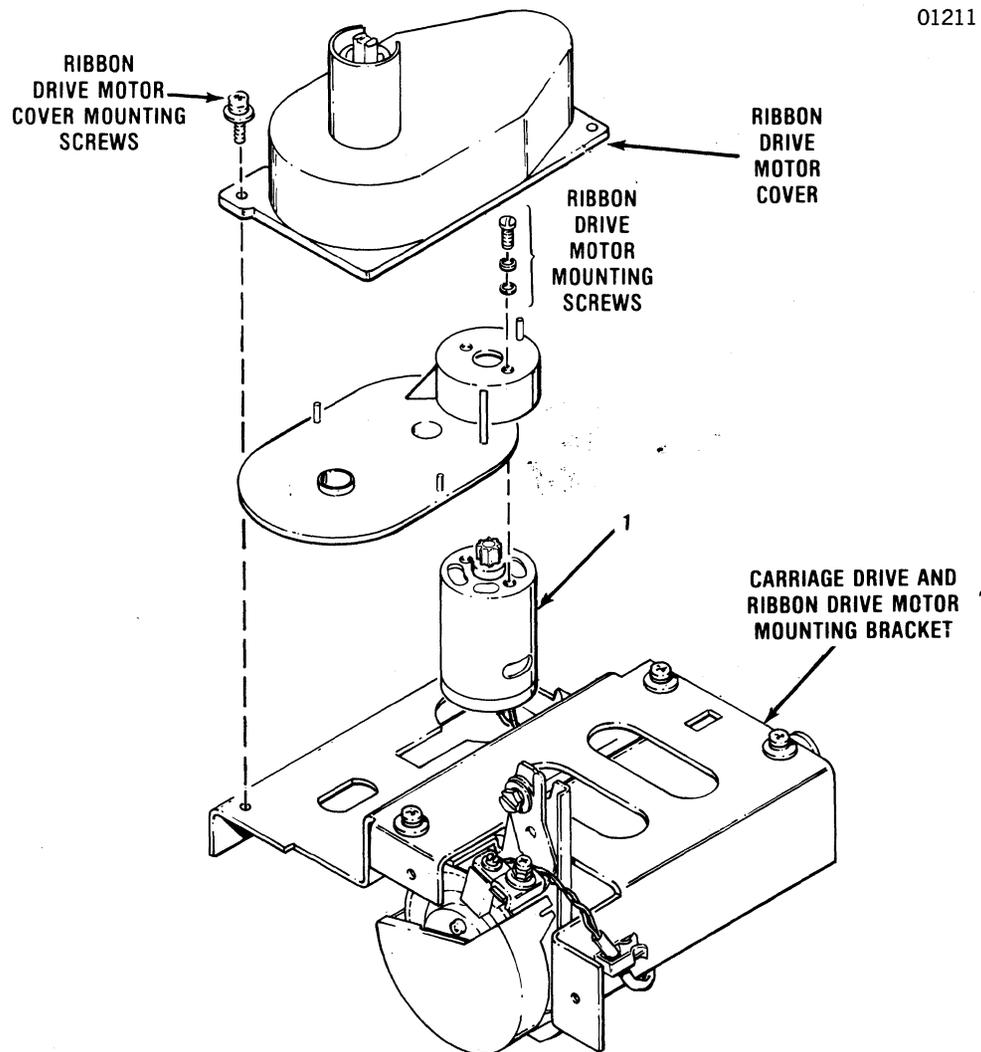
REMOVAL/REPLACEMENT, RIBBON DRIVE MOTOR
